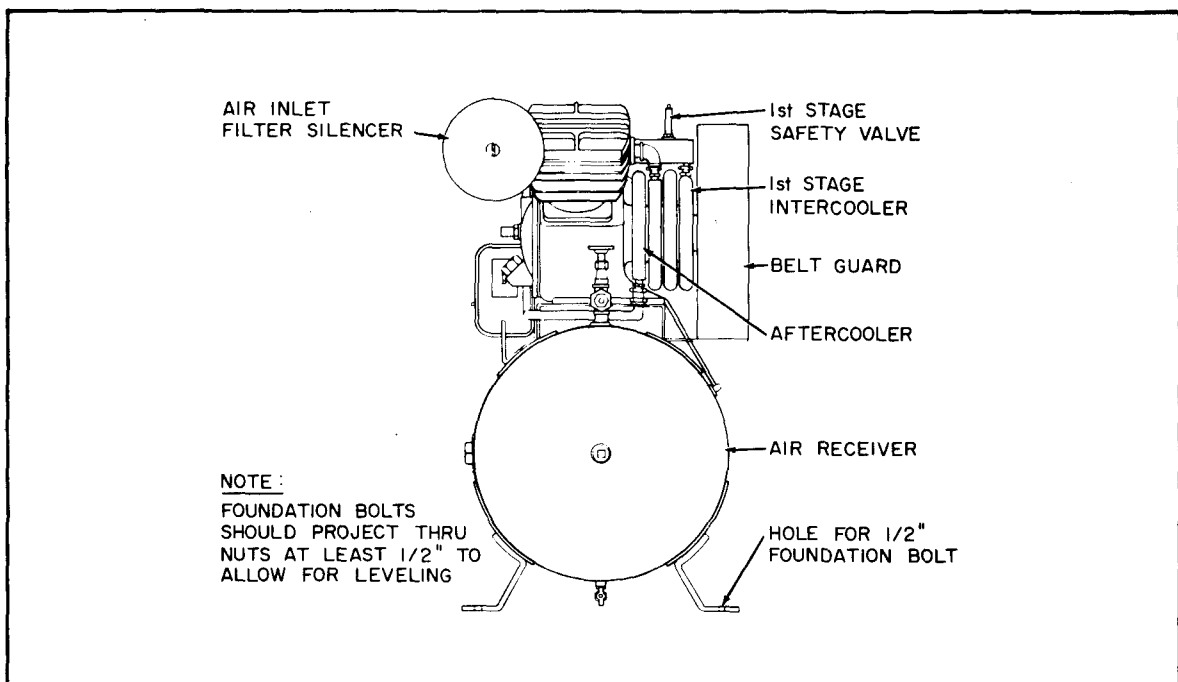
Model 242D7-1-1/2 Compressor, End View
